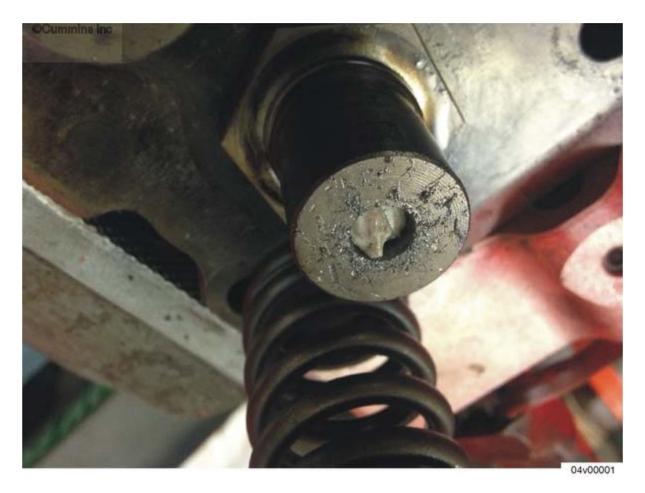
Fractured Fuel Pump Ceramic Pumping Plunger
